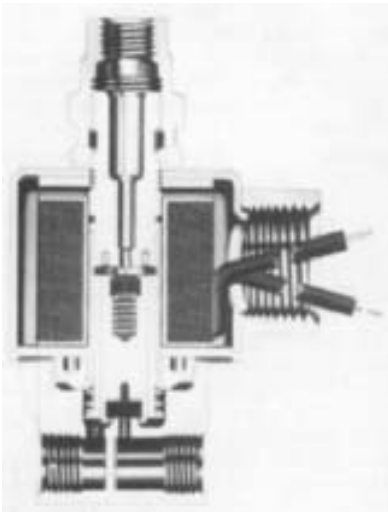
Solenoid valve for three-way operation is direct-acting (Skinner Precision Industries).
